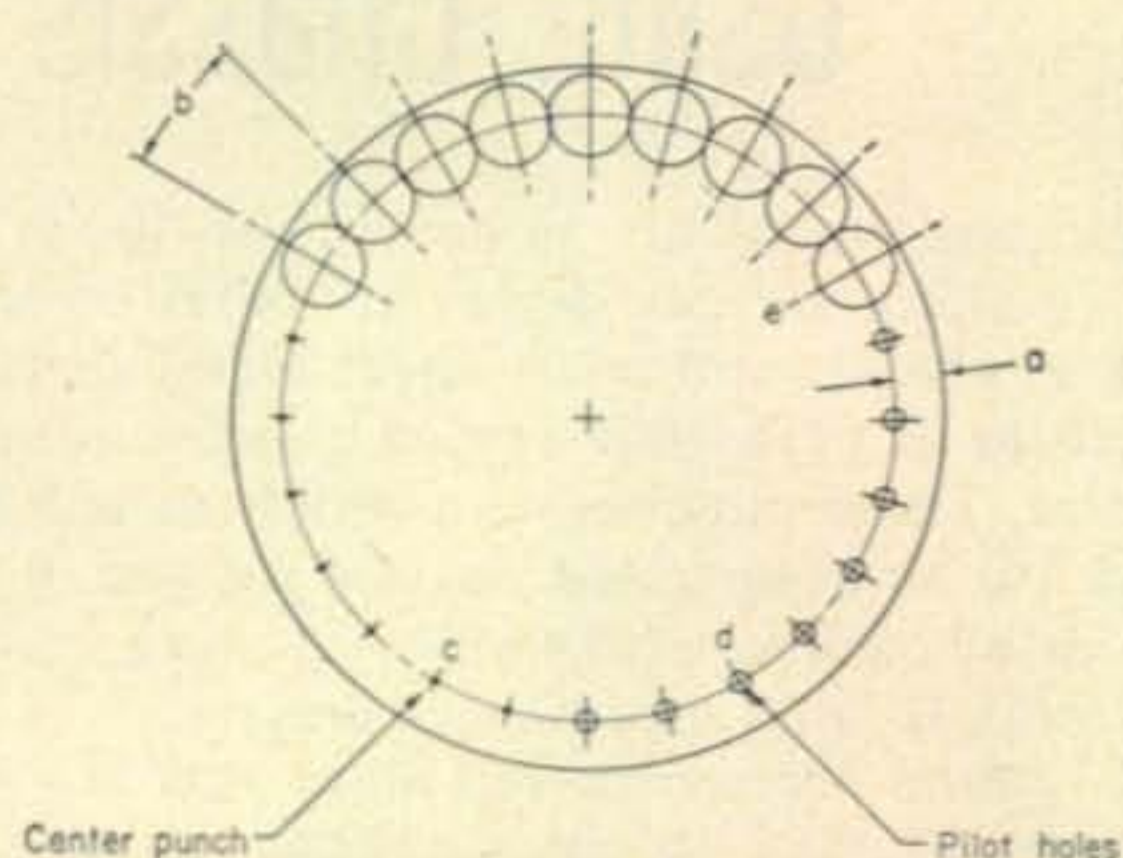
Large holes may be made by drilling a series of smaller holes around the circumference and then knocking or prying out the center piece. Dimension a should be slightly more than the radius of the drill and dimension b should equal the diameter of the drill. The locations for the holes should be made with a center punch as at c , drilled with a small drill as at d and then completed with the larger drill as at e .
